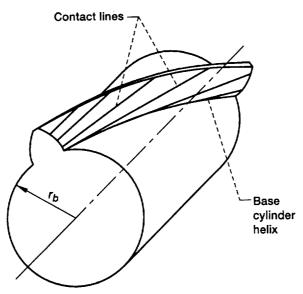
Contact lines on tooth surfaces of helical gear.
